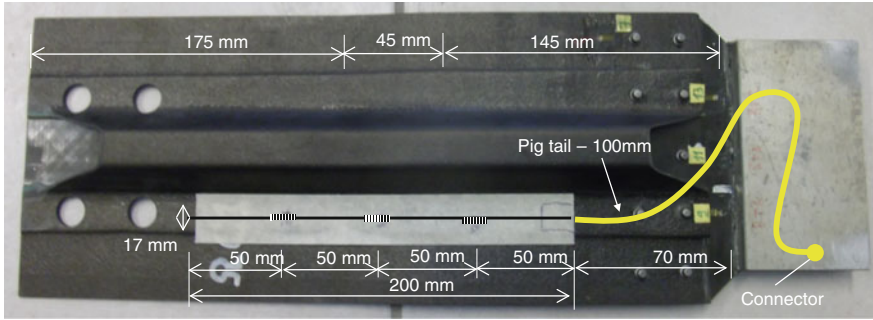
The Omega stringer specimen equipped with a ribbon tape
